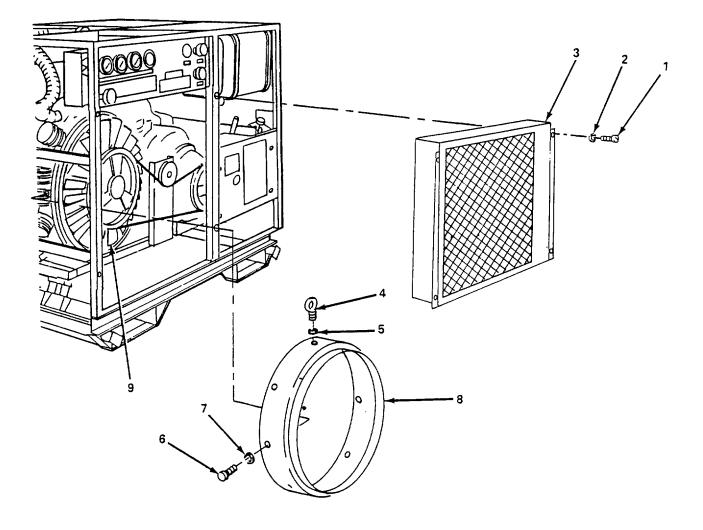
Air Compressor Assembly, Service (Intercooler).
